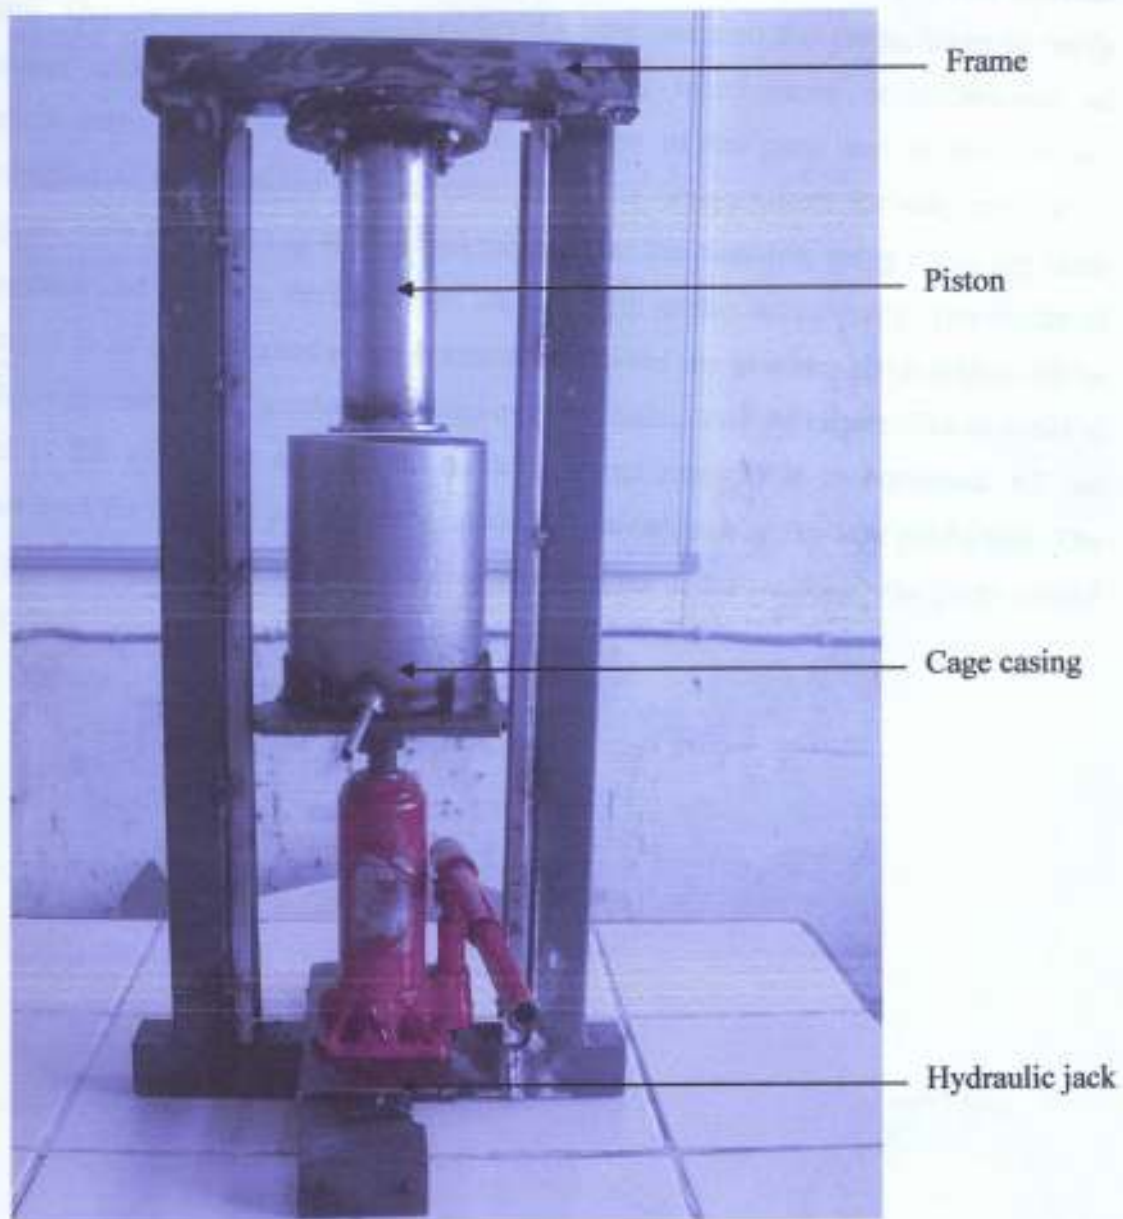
Picture of the Assembly Hydraulic Oil Extractor with the Cage Casing and Discharge Chute
